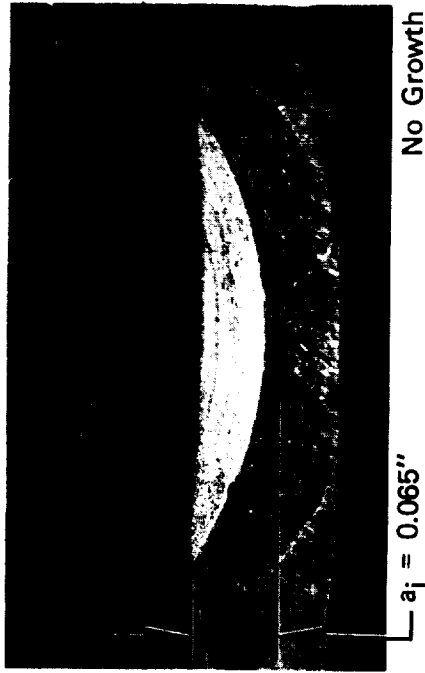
SPECIAL TESTS OF INCONEL 718 WELDMENTS (PART I)
